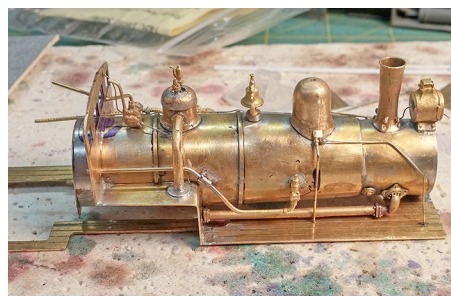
Here the check valve assembly is shown bent into the required shape. The check valve (Cary #13-199 R) is soldered to the boiler while the .032" brass rod is soldered through the cab front. The pipe "coupling" will remain in plain sight on the finished model.
